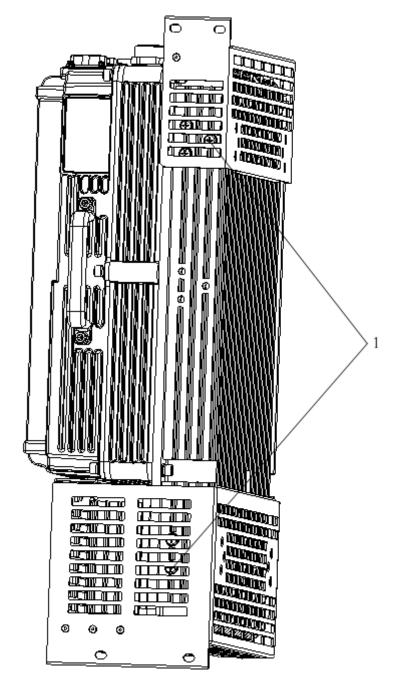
ZXSDR R8860Installed with Upper and Lower Fixing Frame
